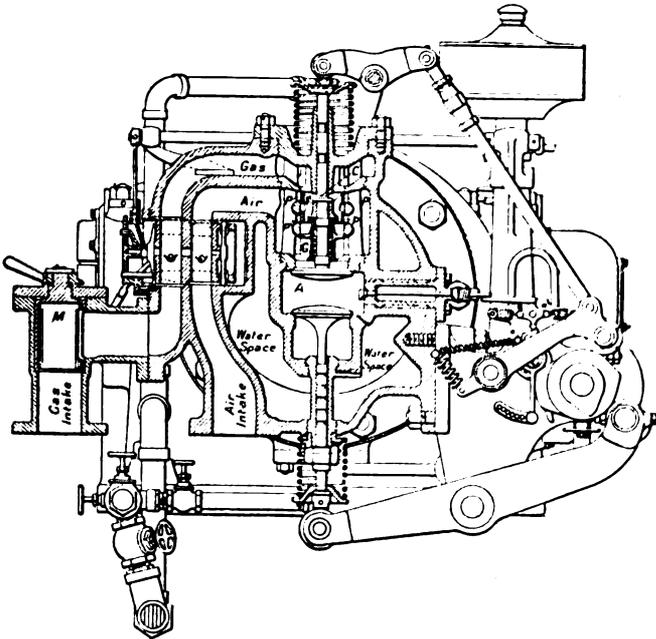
Valve Gear of Olds Gas Power Co.'s Engine.
